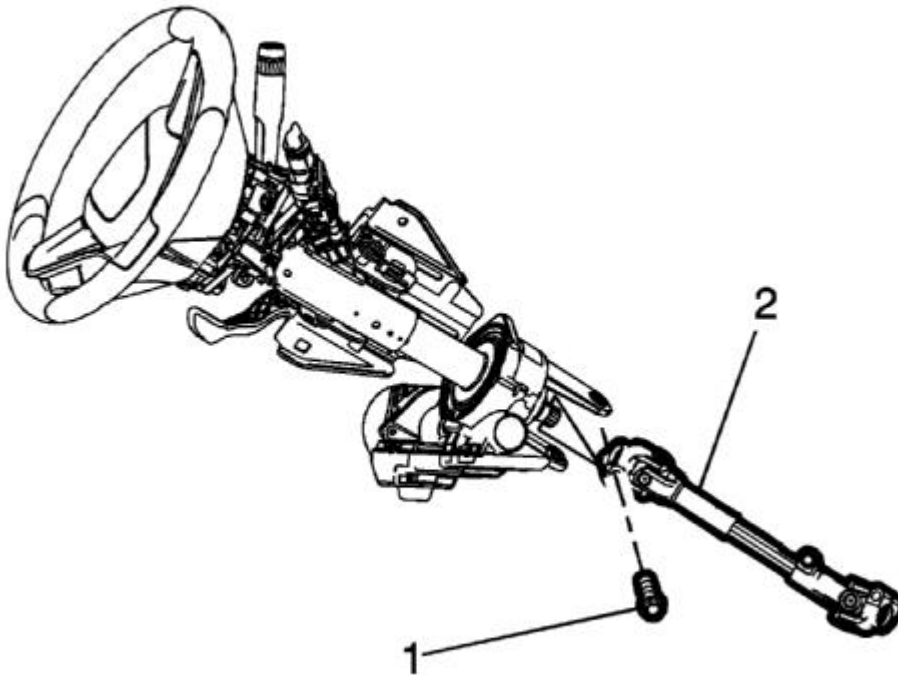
Lower Intermediate Steering Shaft & Bolt
